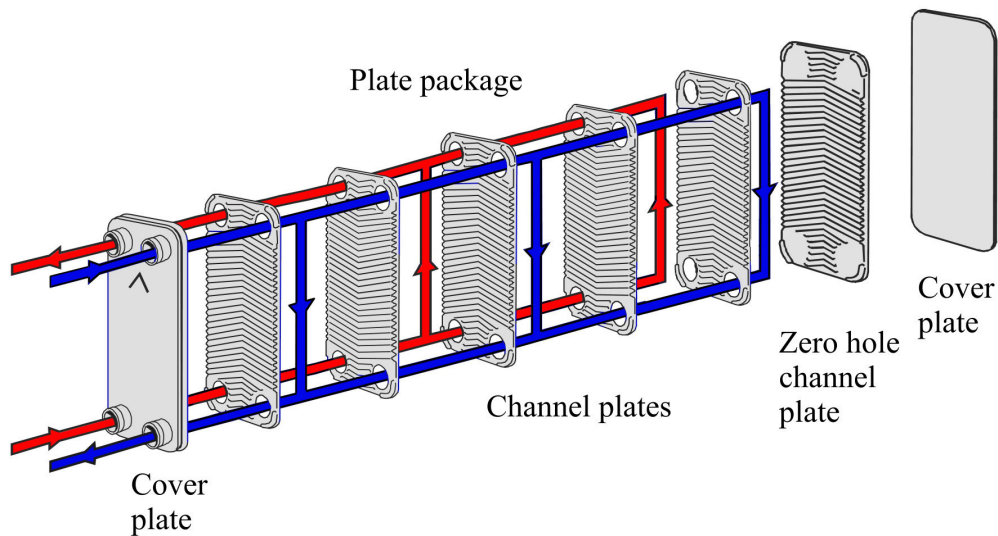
Exploded view of the BPHE. Adapted from [122].
